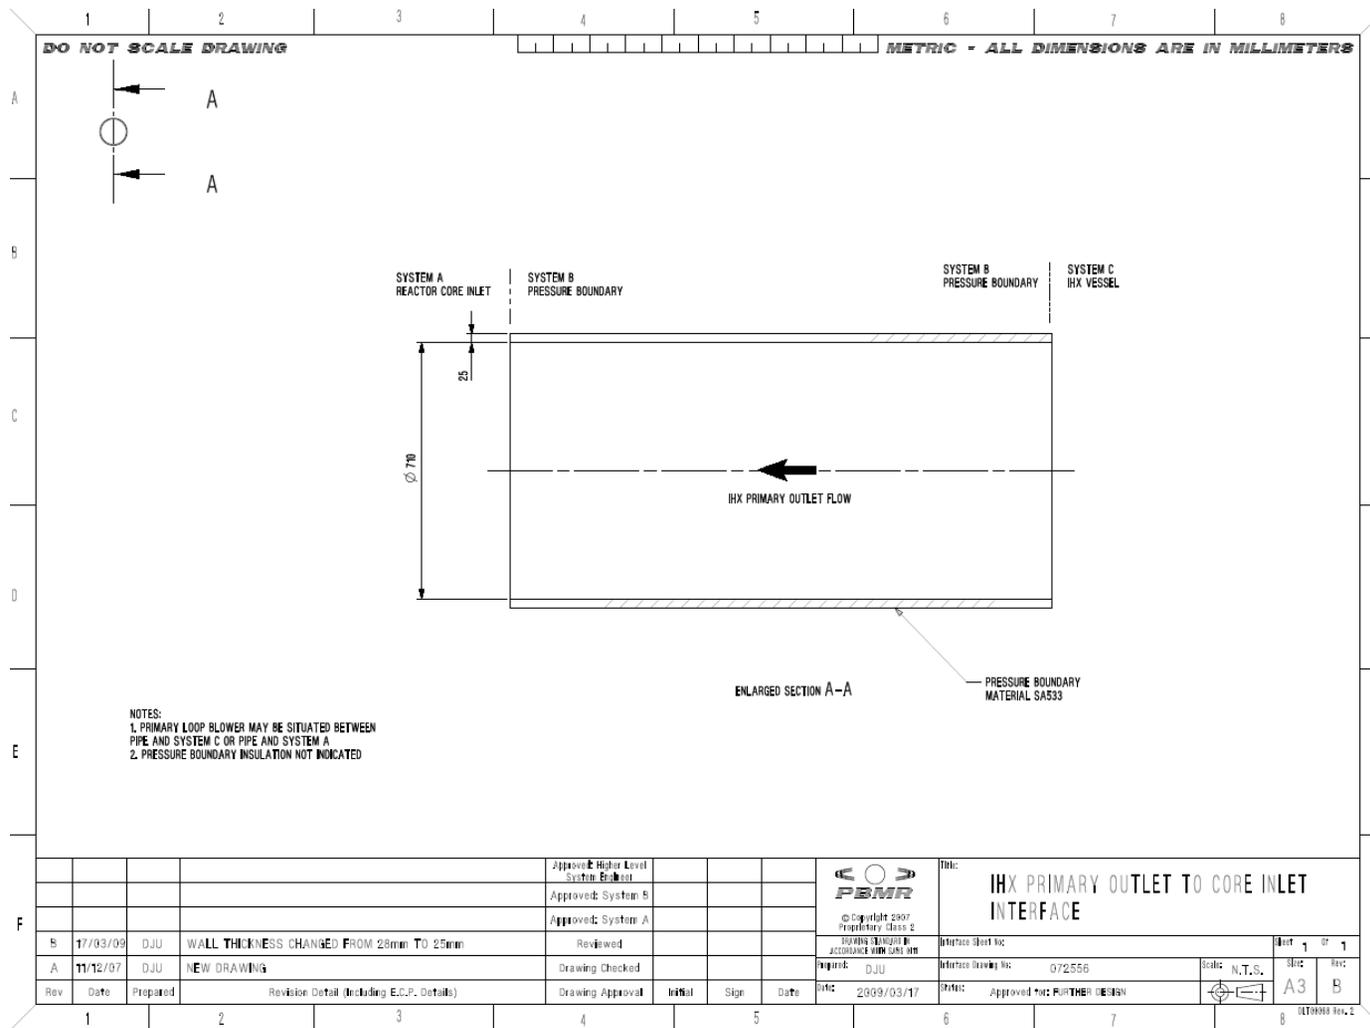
IHX-Reactor Inlet Pipe Interface Drawing (Pipe 2)
